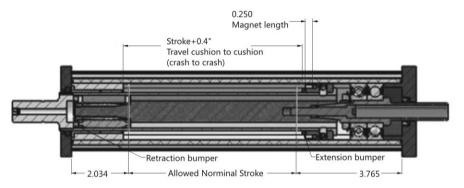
Actuator Shown in fully retracted "crash" position, with contact on forward impact bumper
